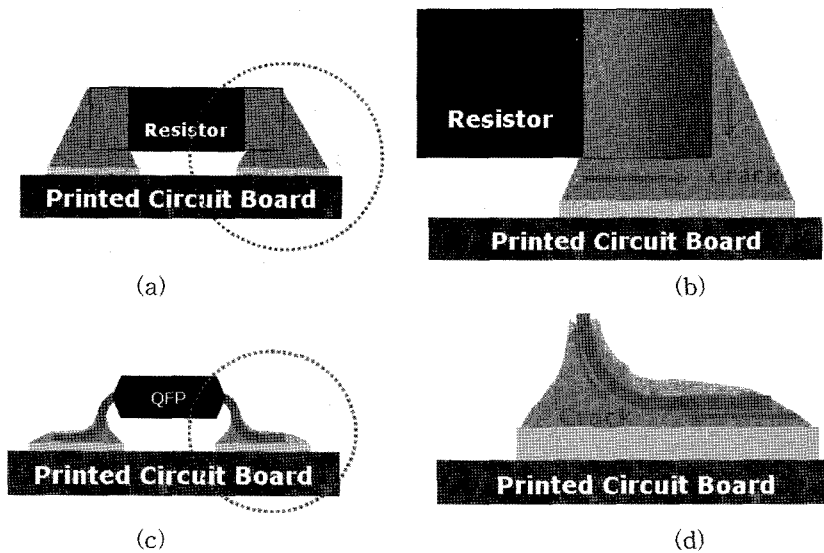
Crack propagation mechanism of solder joint for (a), (b) chip resistor and (c), and (d) QFP.
